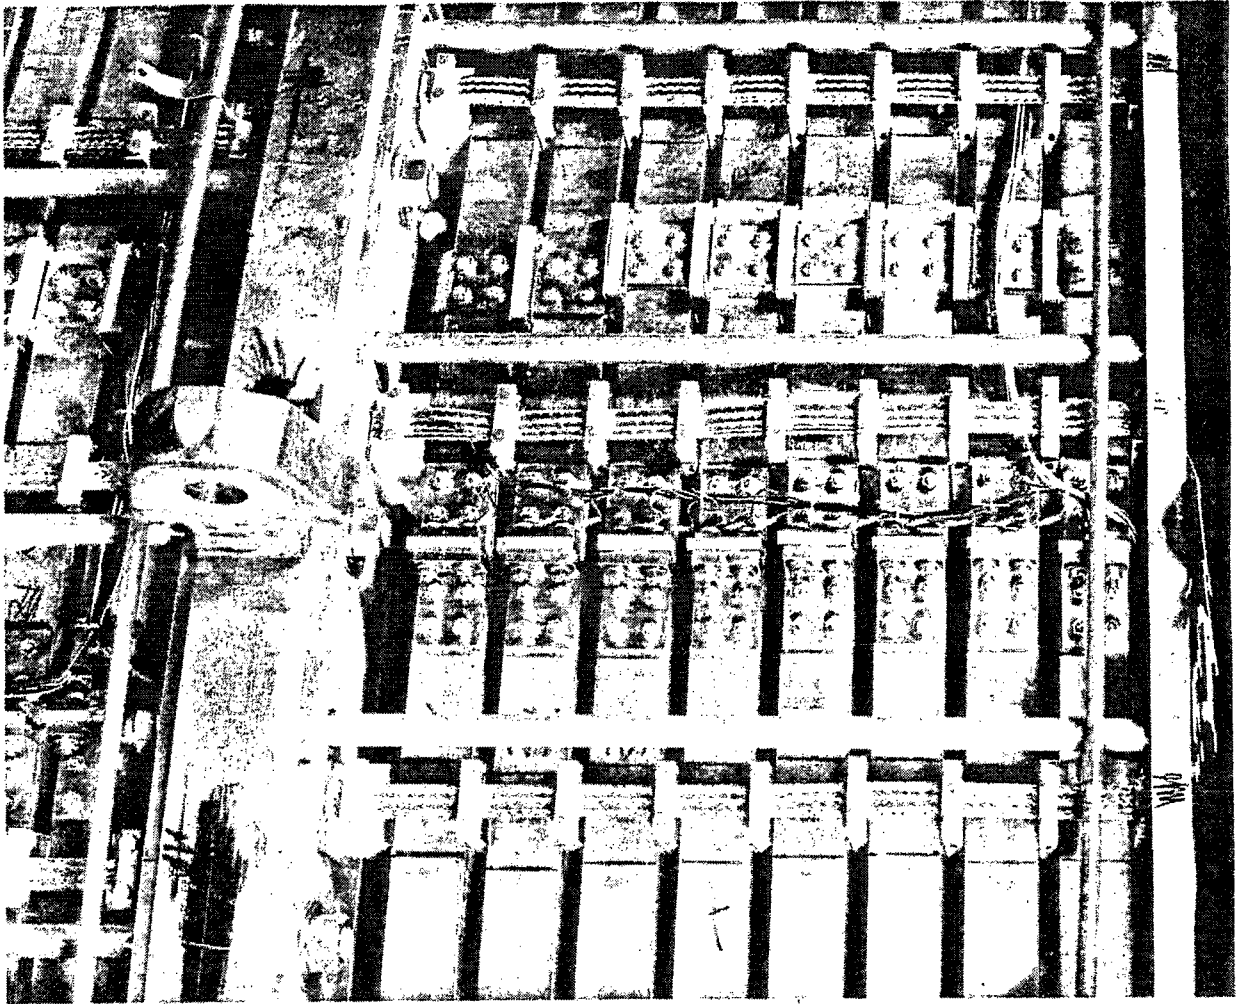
Photograph of a portion of a coil assembly showing the mode of clamping of a coil stack to the girder ring with stainless-steel tie bolts, the thermal clamps, the electrical interconnections between pancakes and the mechanical clamping arrangement for the ends of the conductor.
